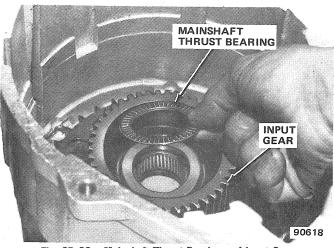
D-23 Mainshaft Thrust Bearing and Input Gear
